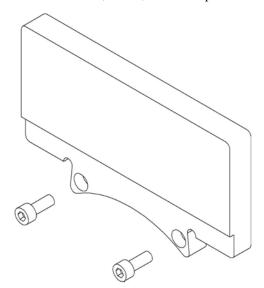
Protective Cover for Tool Side (PAA-T)
